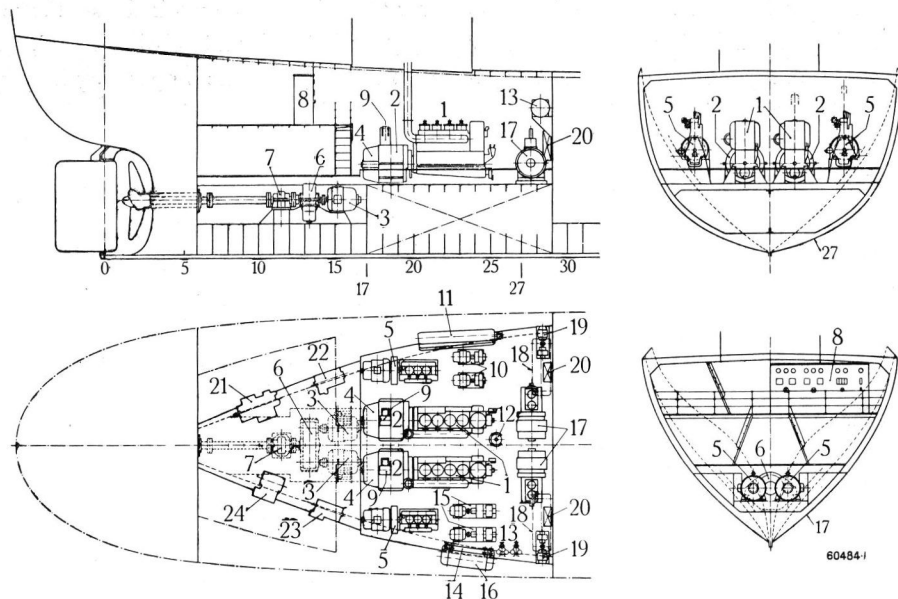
Arrangement of the machinery of a 1100 S.H.P. trawler with Diesel-electric d.c. drive.
